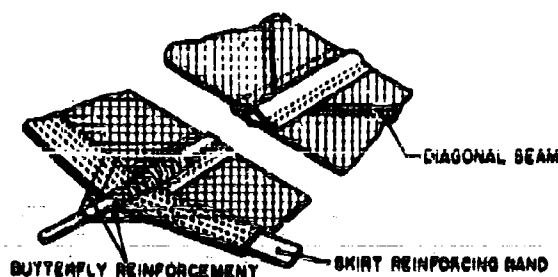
Joint Reinforcement, Butterfly Type
